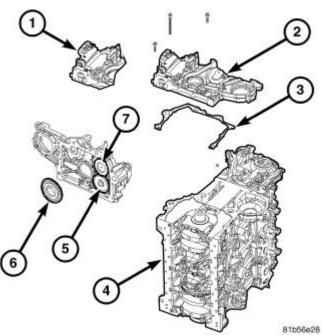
VACUUM PUMP AND OIL PUMP Courtesy of CHRYSLER LLC
